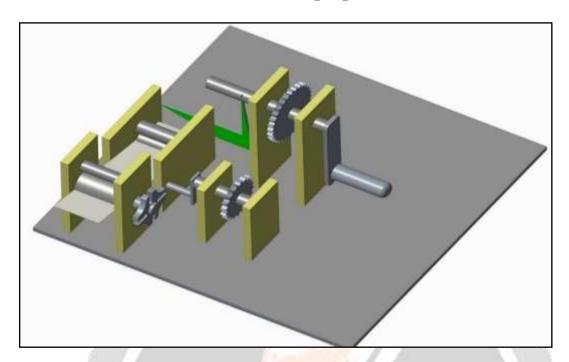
D Model of Automatic Paper Cutting Machine by using Geneva mechanism
